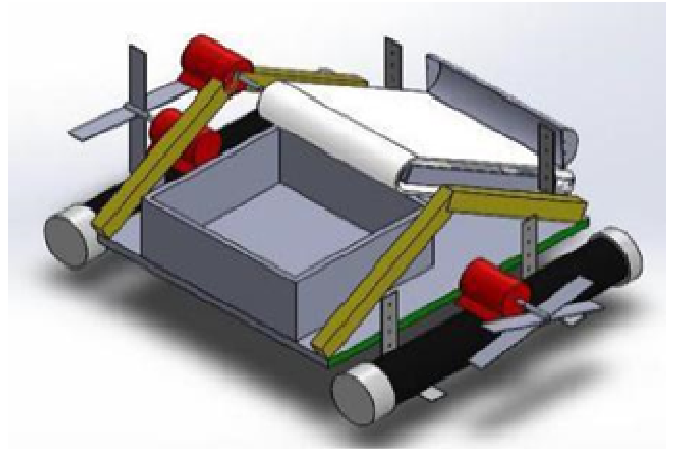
3D Design of the Robot back view(designed in SolidWorks)
